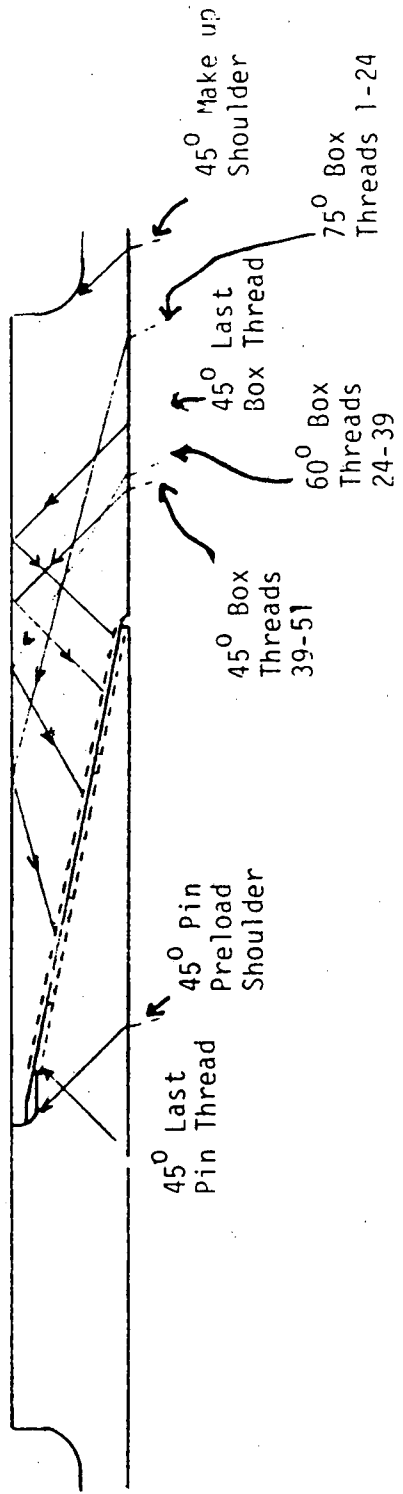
Ultrasonic beam angles for the thin walled coupling
